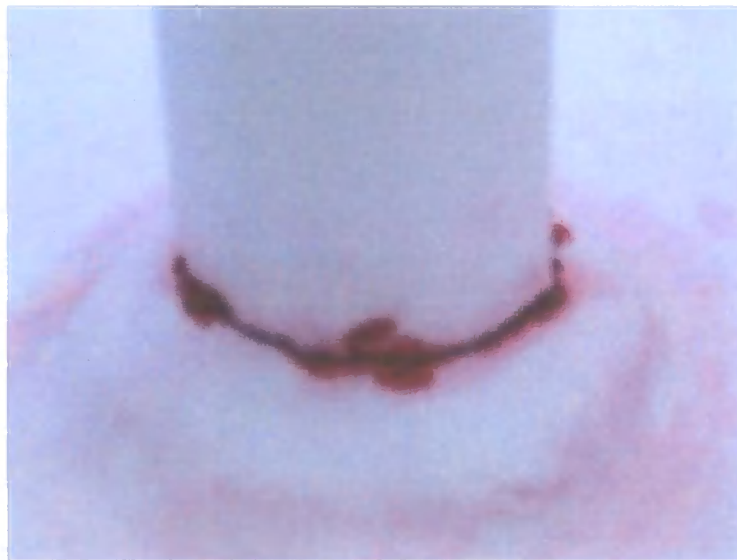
Example of DPI used to inspect weld condition
